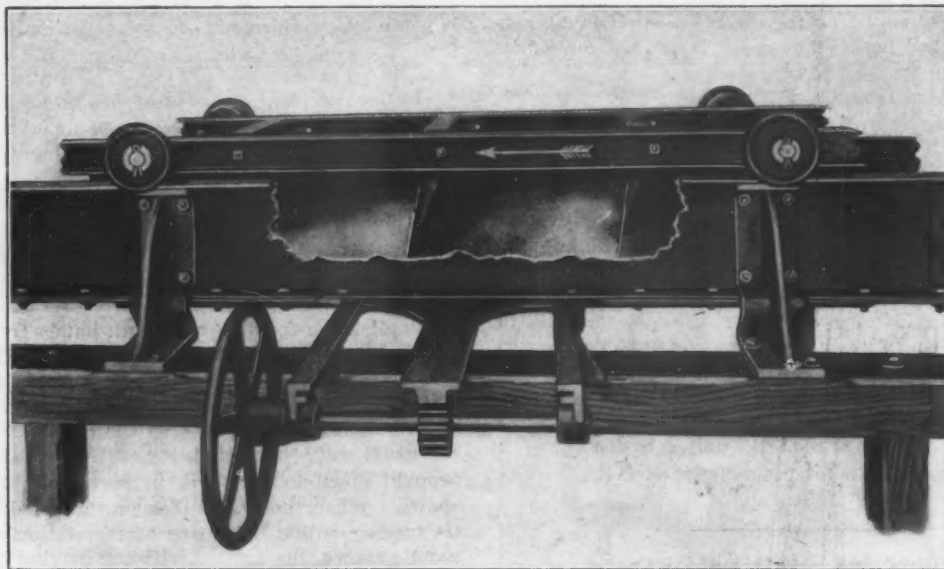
The Link-Belt Reciprocating Conveyor with the Flights Pushing the Sand Forward.
